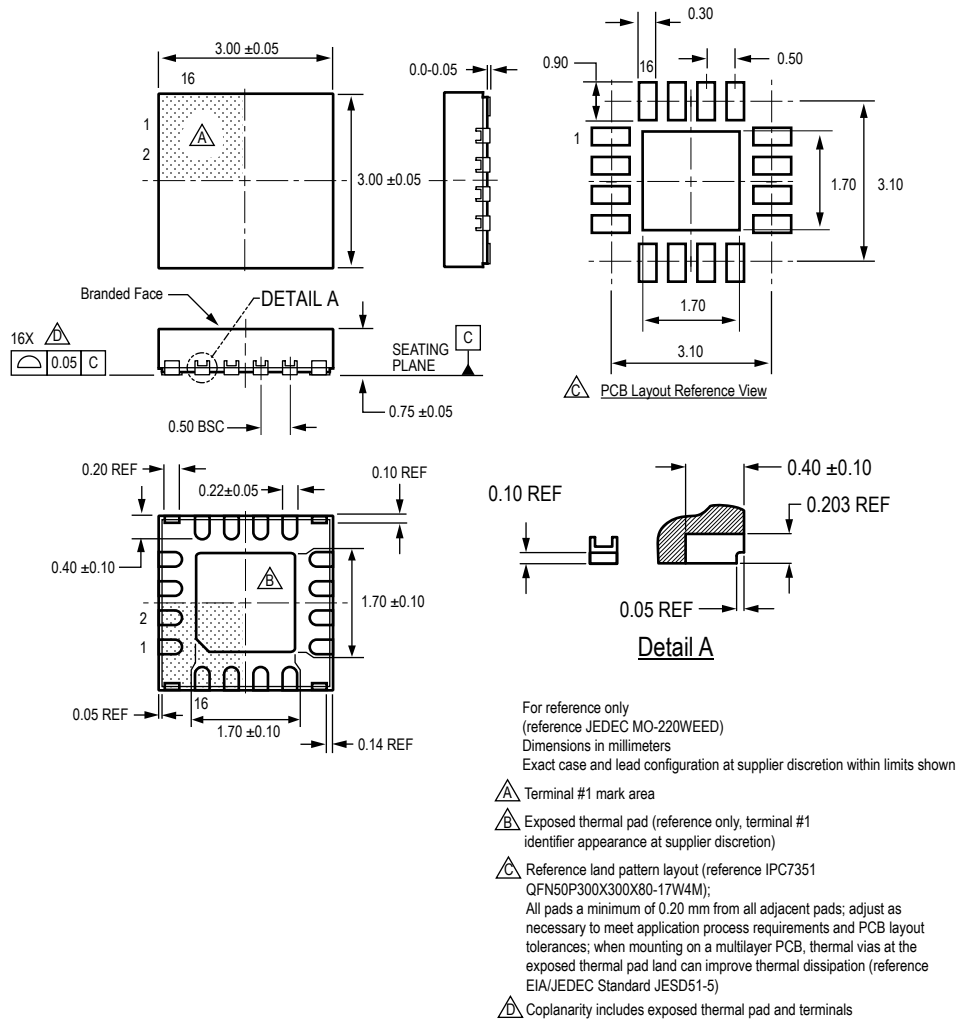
Package ES, 16-Pin TQFN with Exposed Thermal Pad and Wettable Flank
